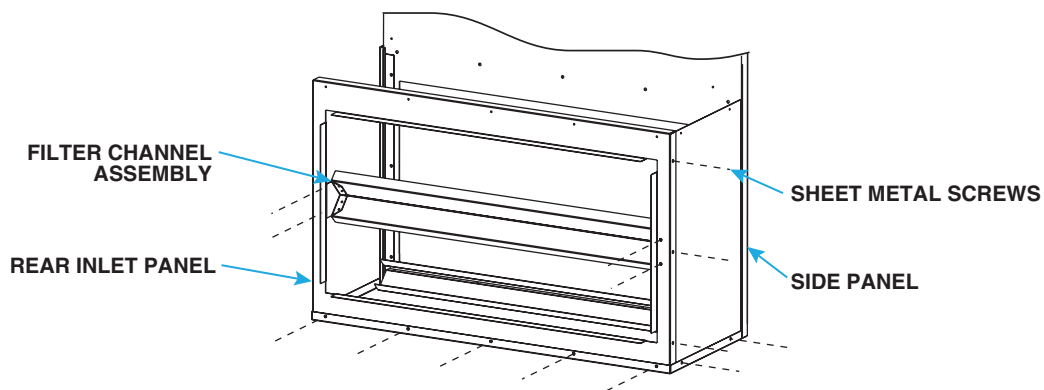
Install Side Panel, Rear Inlet Panel, and Filter Channel Assembly
